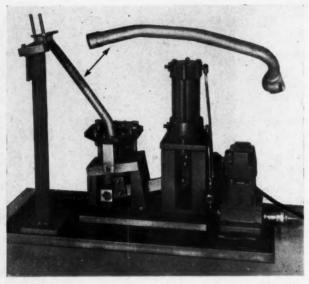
A typical set-up for inductionbrazing fittings to fuel pipes for jet aircraft and missiles. A titanium mandrel, which is expanded in the tube by an air cylinder, serves to spread the filler alloy uniformly throughout the joint
